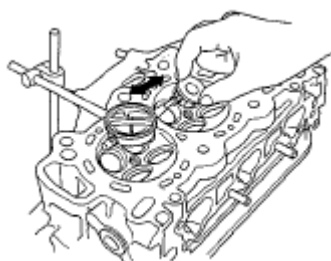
Identifying Intake Valve Stem-To-Guide Clearance
